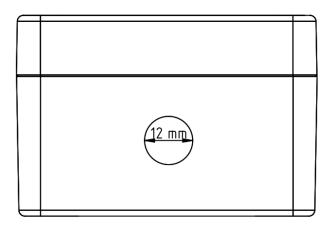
Enclosure side view and non-threaded entry hole drawing. Entry diameter of 12.0 - 12.2mm is taken from the cable gland mounting instructions document (see in appendix).
